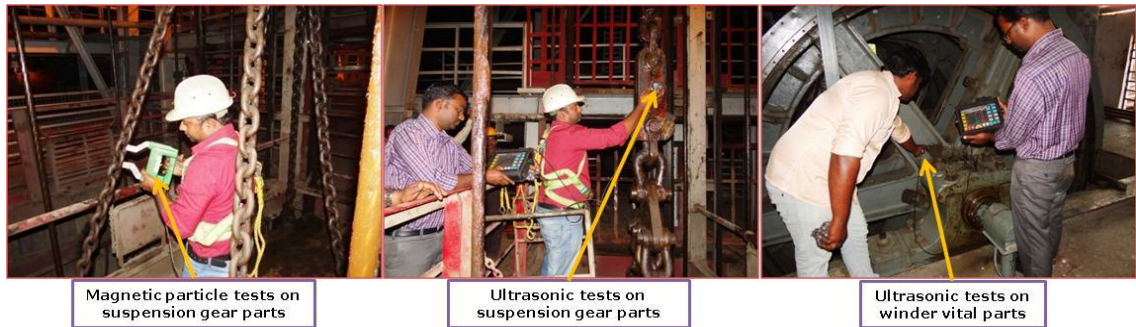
NDT on winder vital components & suspension gear parts, M/s SCCL
